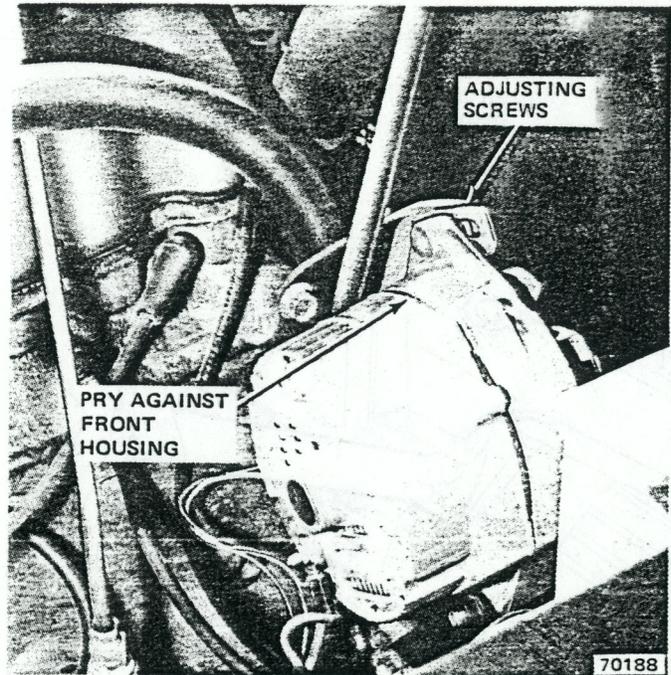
C-19 Six-Cylinder Engine (w/o A/C) Alternator Drive Belt Adjustment
